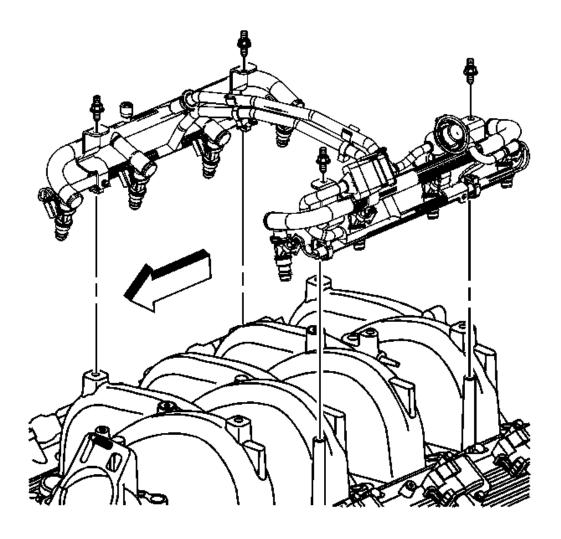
View Of Fuel Injection Rail Courtesy of GENERAL MOTORS CORP.
